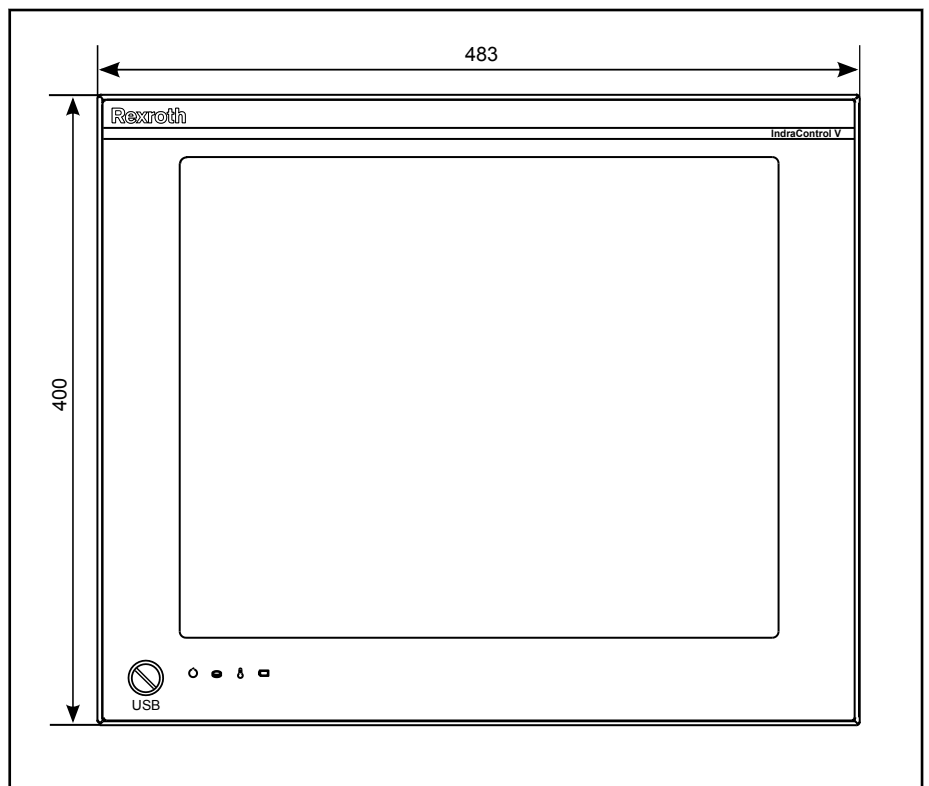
Dimensions: Front panel of the VDP 60.3
